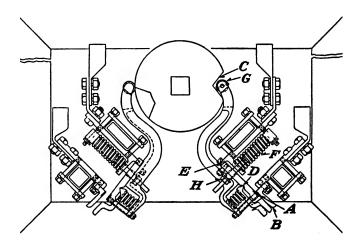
Contactors and cams for controller shown in Fig. 76.
